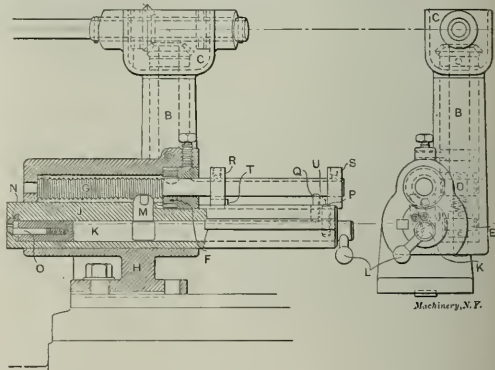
Construction of the Mechanism of Chasing Attachment.
